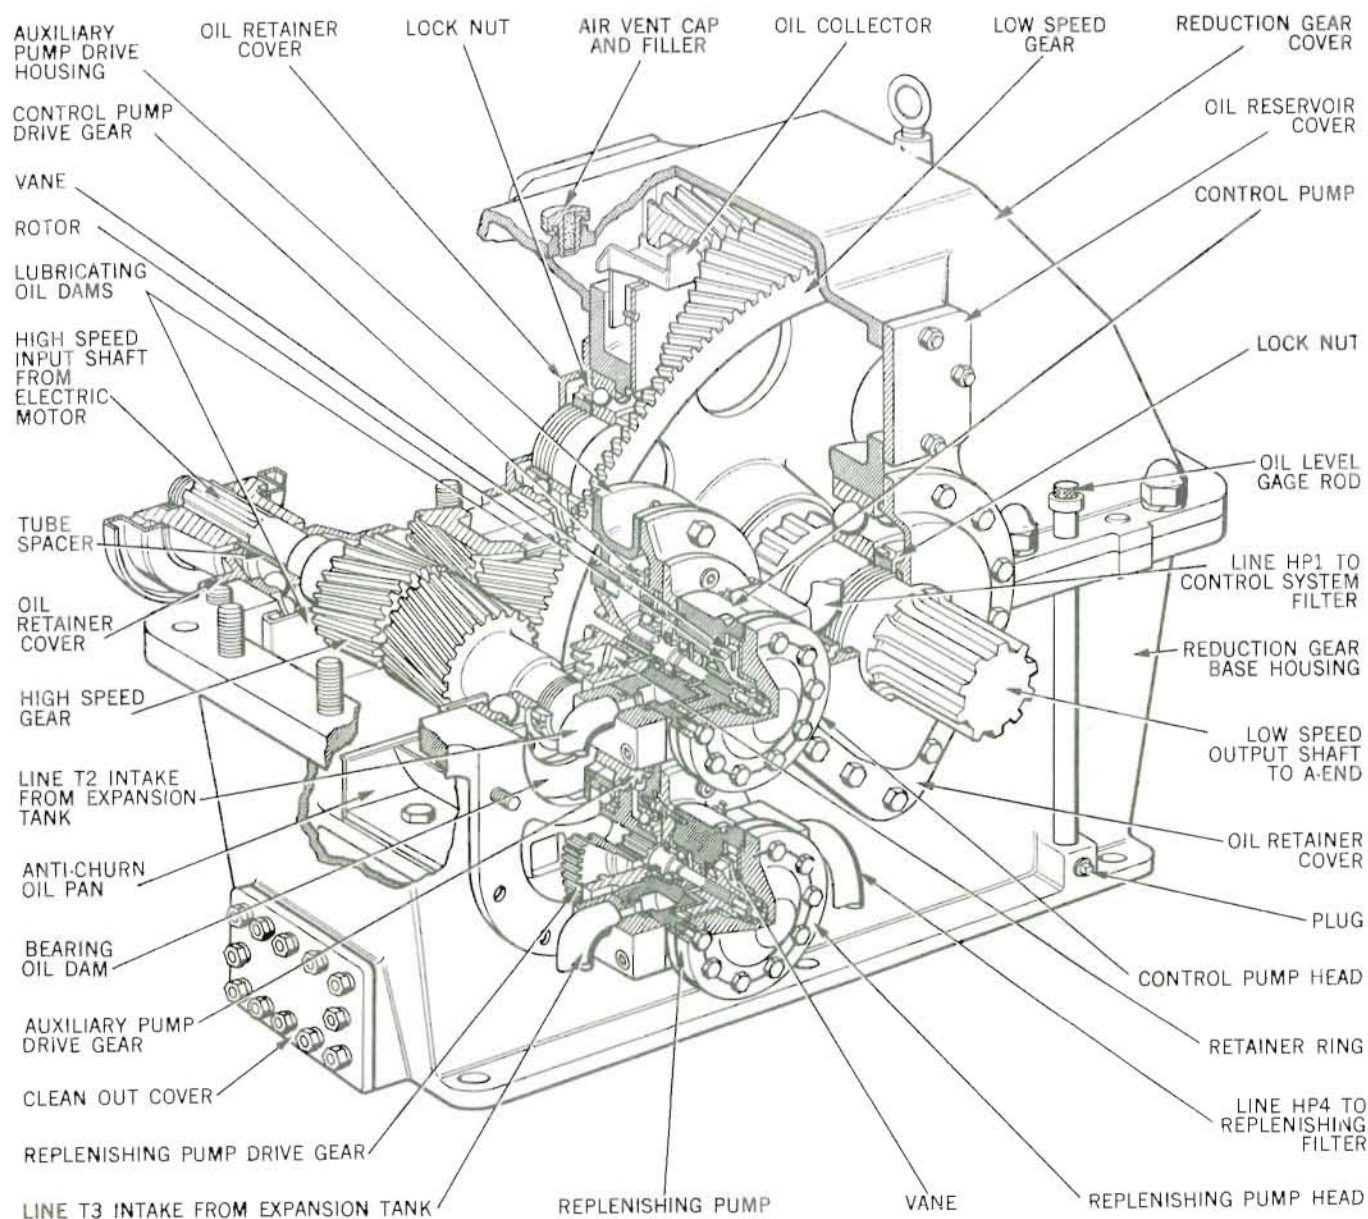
Training Gear Reduction Gear and Replenishing Pump Assembly, Cutaway View
